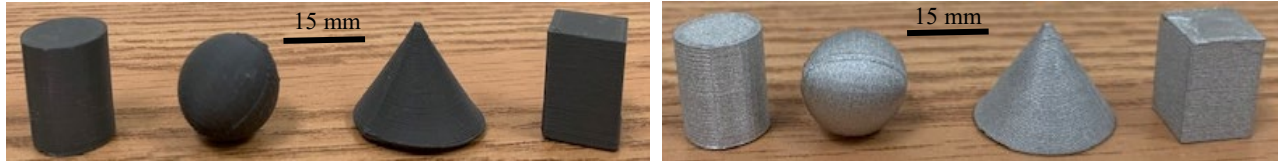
316L stainless steel printed green parts (left) and sintered parts (right).
